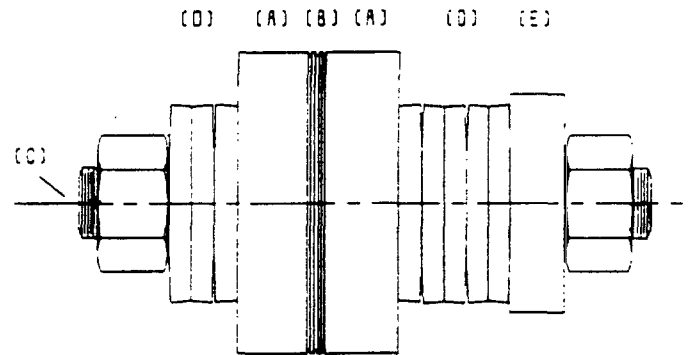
Aging Fixture Components: (A) Compression Platens, (B) Stacked Specimens, (C) Stud Bolt, (D) Springs, (E) Load Collar
